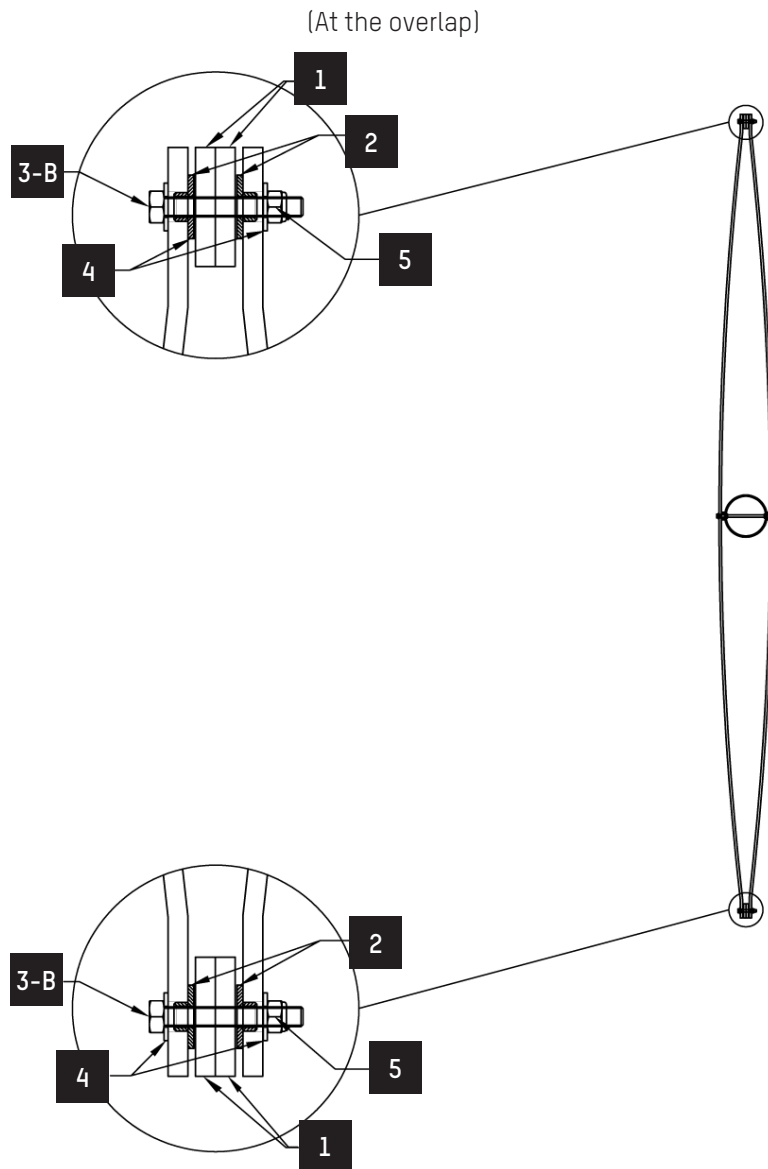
Installation of the folding fence - Assembly of the upper and lower link bars
